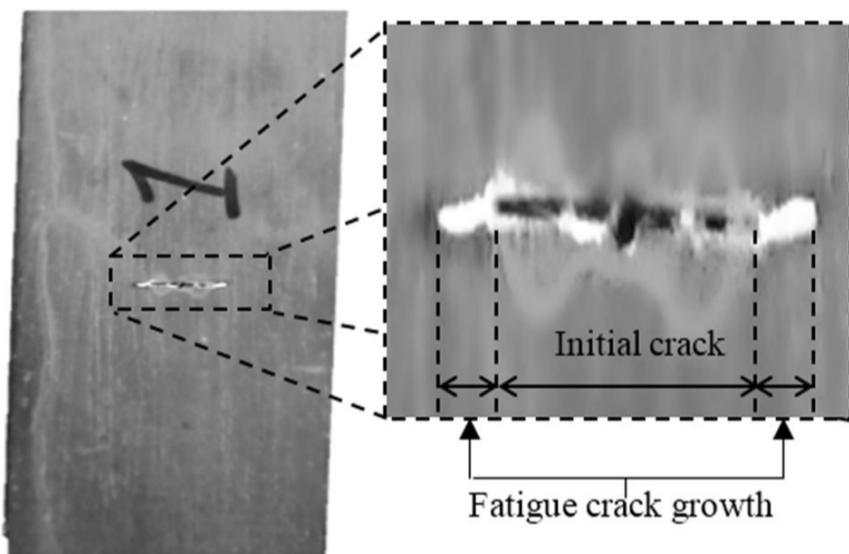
crack length measurement by liquid Penetrant Testing
